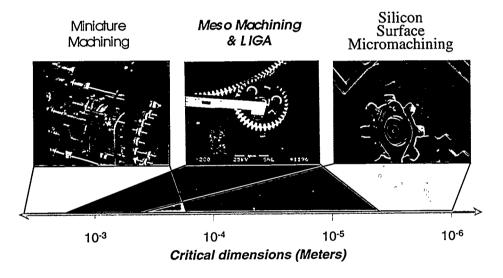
Perspective of miniature machining, meso-machining, and micro-machining.
